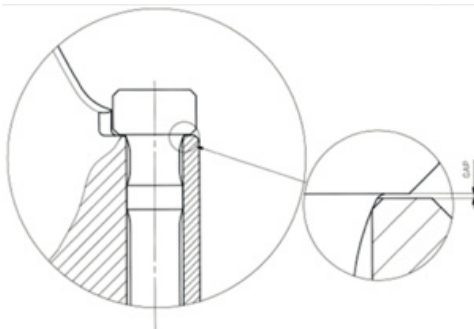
Improper seat of the bolt on mismachined chamfer.
